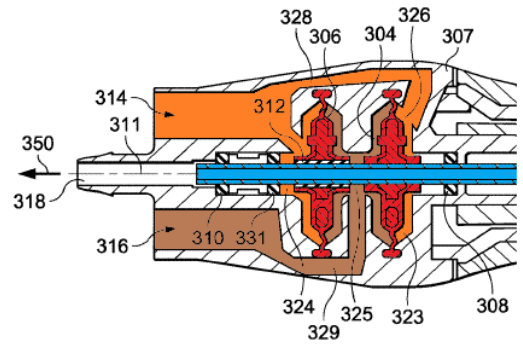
Schematic representation of the dual diaphragm mechanism. Relevant components: 304 = movement generating diaphragm, 306 = counterbalancing diaphragm, (308 & 310 & 331) = O-ring seal, 311 = vacuum connector, 312 = Low friction sealing bearing, 314 = Pressure pulse receiver inducing backward motion of cutter, 316 = Pressure pulse receiver inducing forward motion of cutter, Cutter is highlighted in orange. Adapted from: [42]
